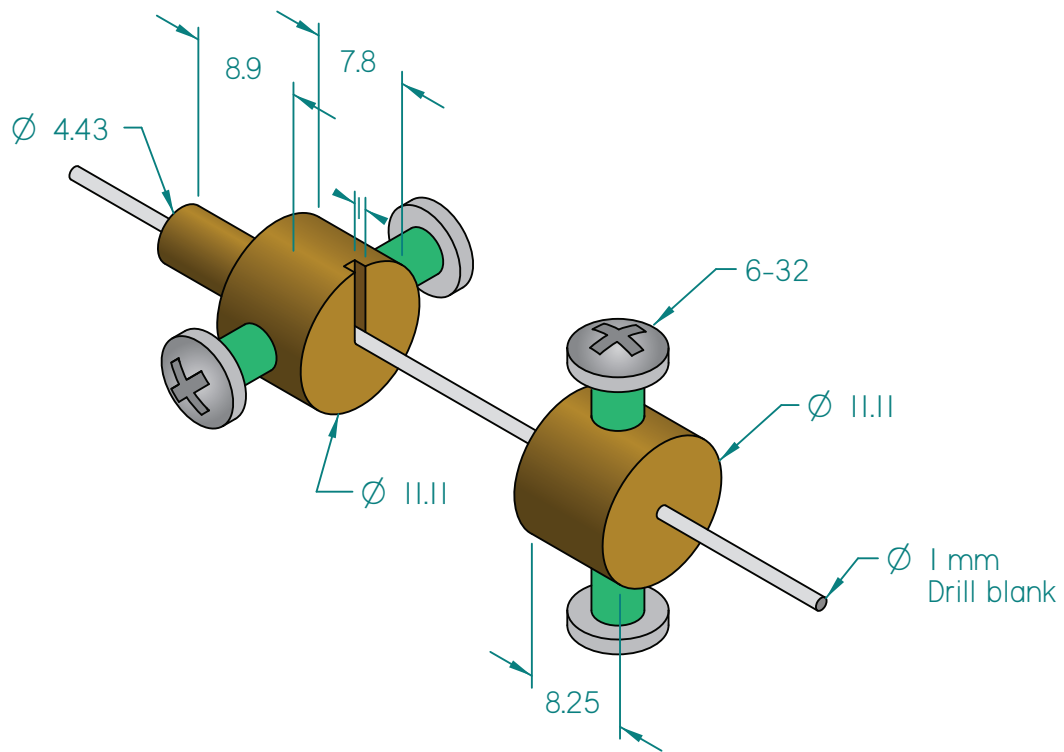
Pickup coil former dimensions (mm). Materials: Brass and steel. 2:1 scale.
